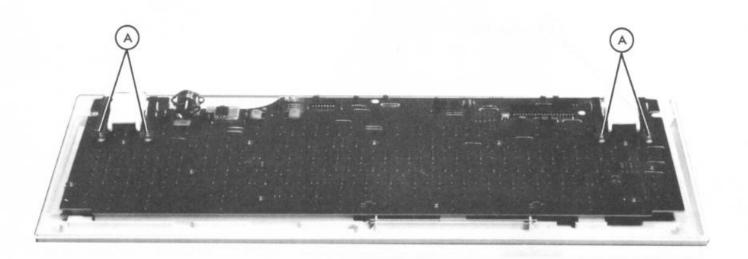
KEYBOARD CIRCUIT BOARD REMOVAL/REPLACEMENT
